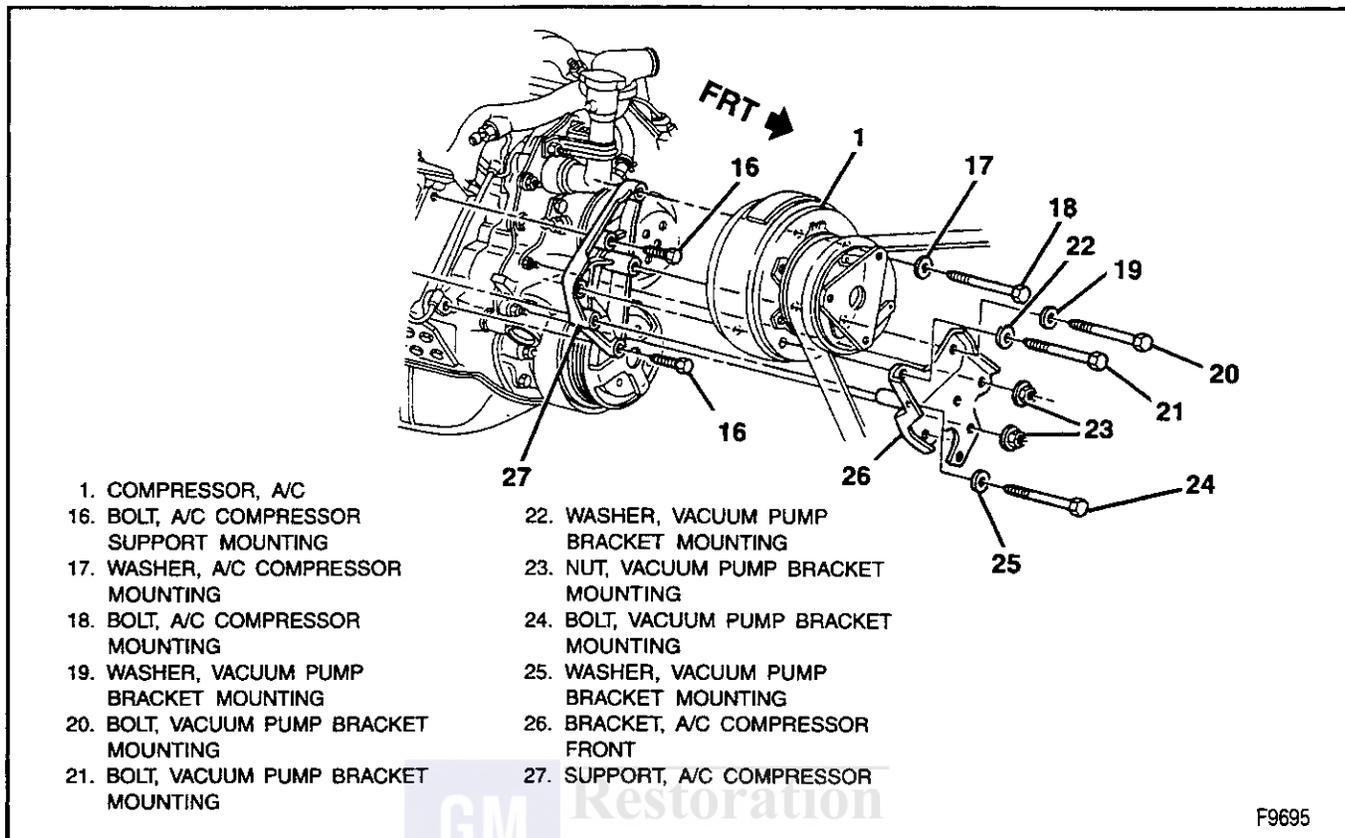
Compressor Mounting (6.5L Diesel Engines)
